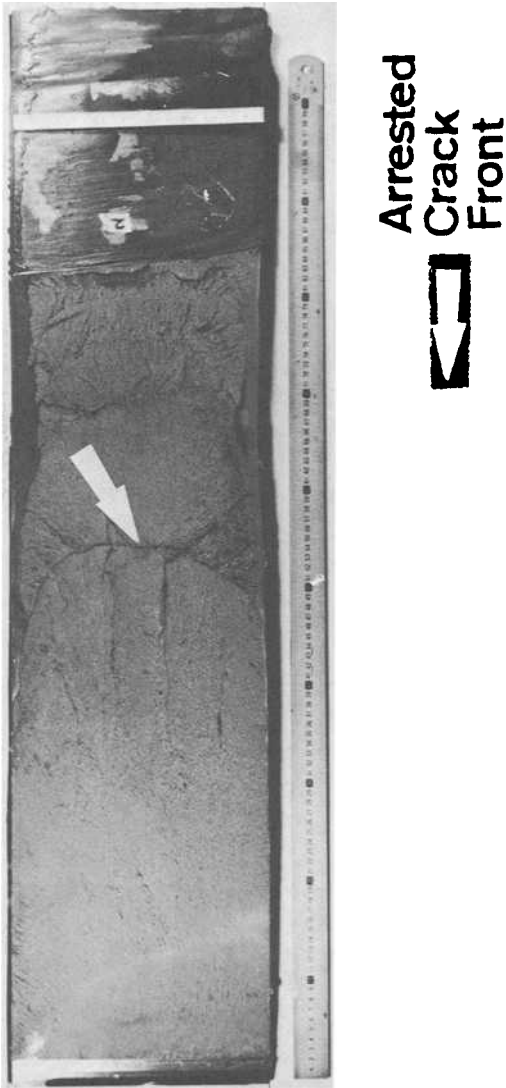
Fracture surface appearance of an ESSO specimen tested with a tensile load of 5000 ton force.
